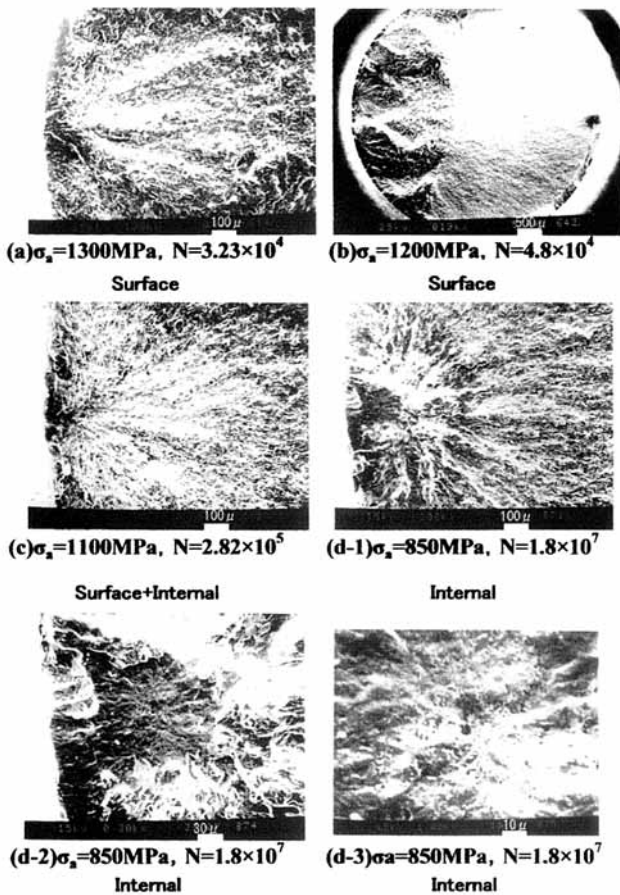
Fractographs showing the initiation site of fatigue fracture
